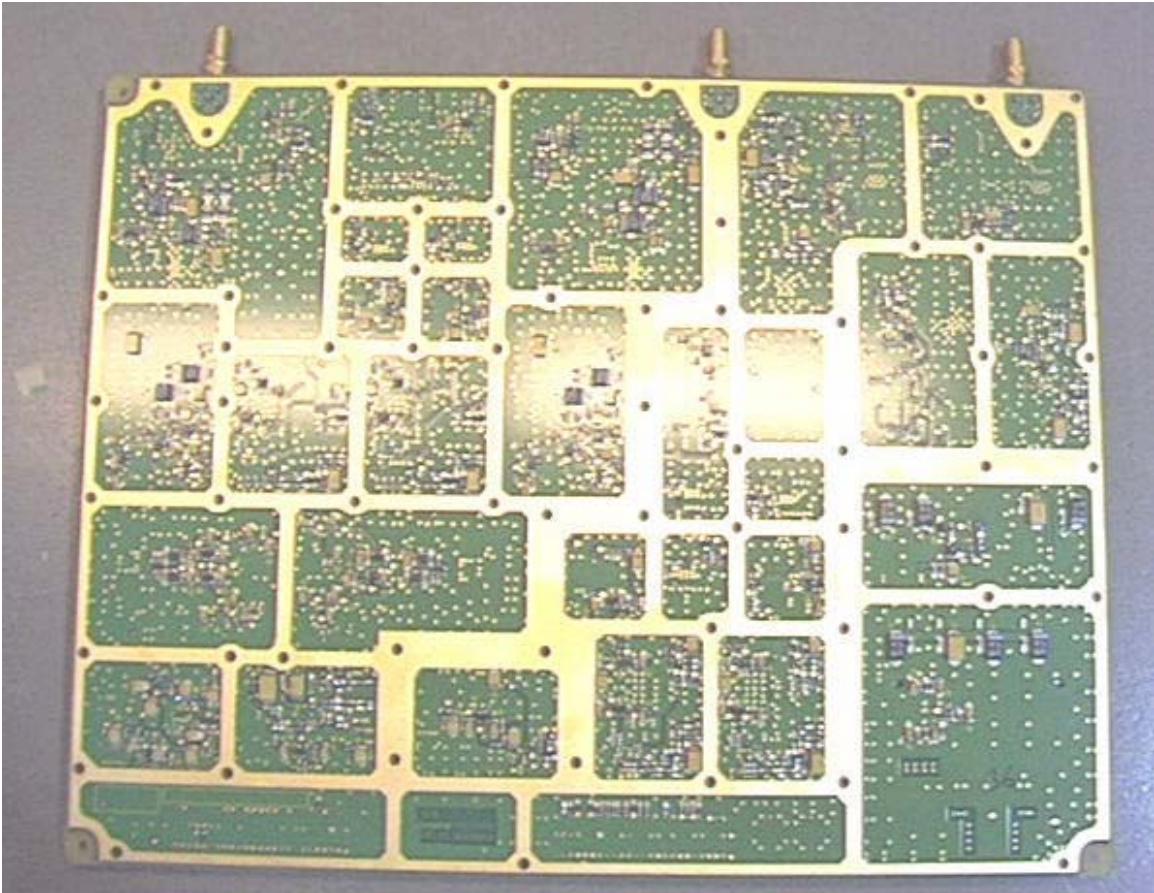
E-RDRX 1900 MHz (Radio Board) Bottom View
